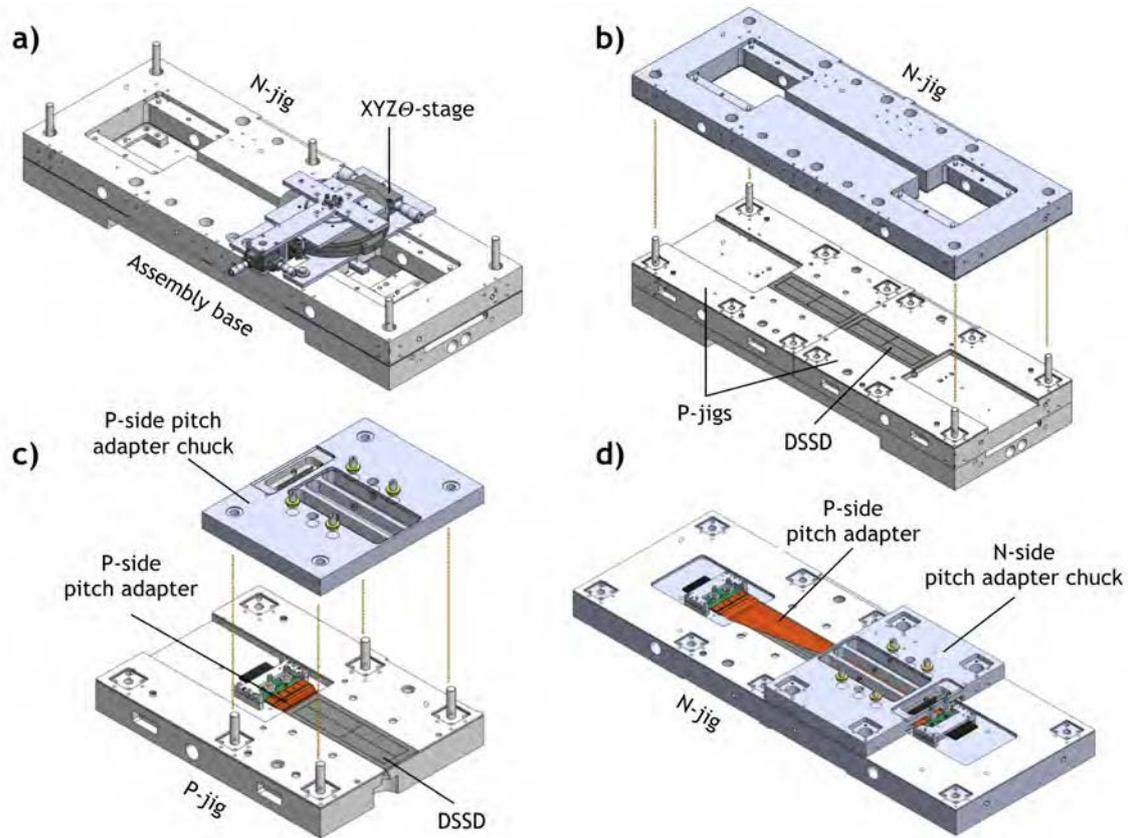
Some steps of Layer 3 ladder assembly: a) alignment of DSSD using XYZ θ -stage; b) positioning silicon sensors on the P-jigs; c) gluing of P-side pitch adapter between DSSD and hybrid sandwich; d) gluing of N-side pitch adapter.
